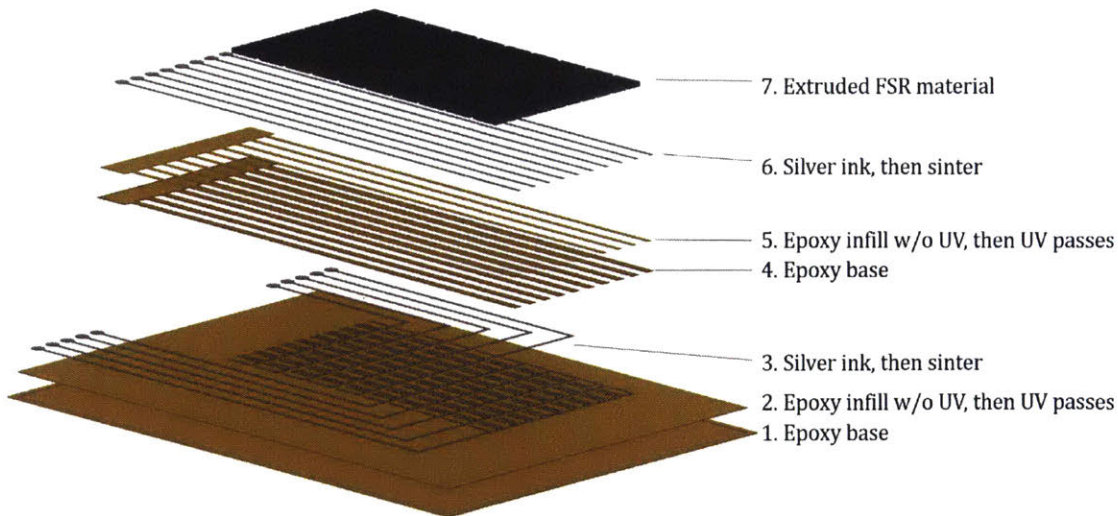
Exploded view of pressure sensor annotated with printing steps
